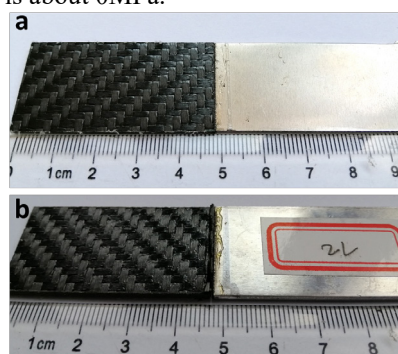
(a) Butt joining of sample A; (b) Butt joining of sample D
